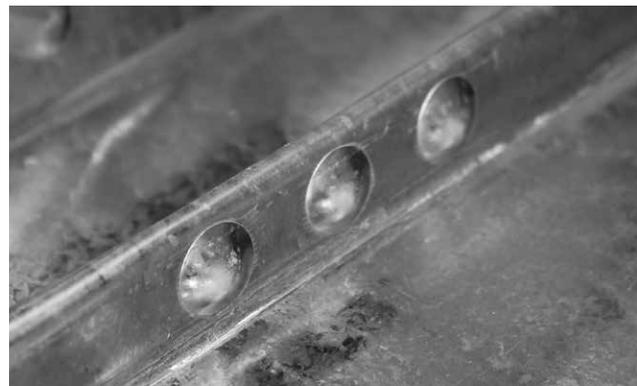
TRIPLE FLOOR CONNECTION
